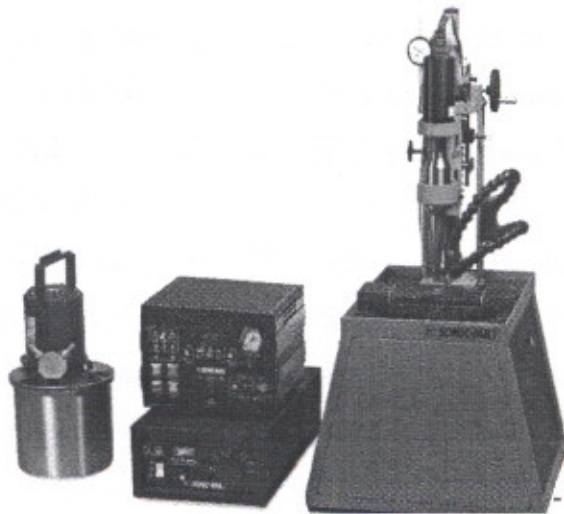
Compact 500W USM machine for small, light-weight work piece [57]
